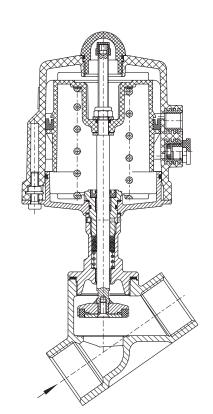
Type 3353 Angle Seat Valve Actuator with fail-safe action: fail-open
